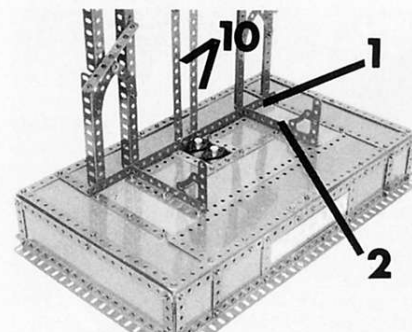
The base of the Clock prior to fitting the front section of the body.
